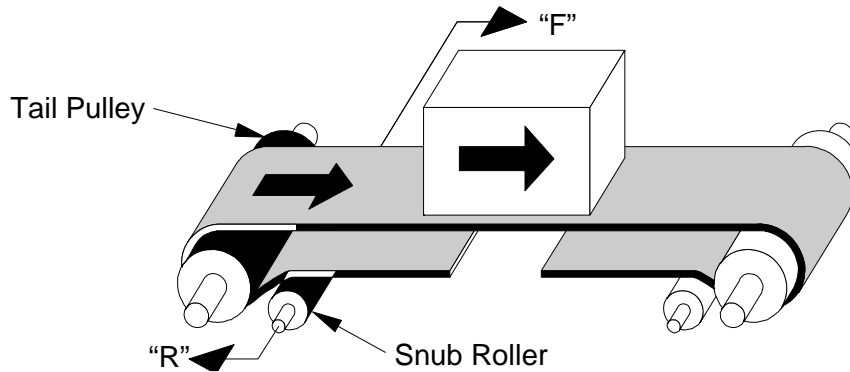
Adjusting the Right Side of the Tail End Snub Roller
